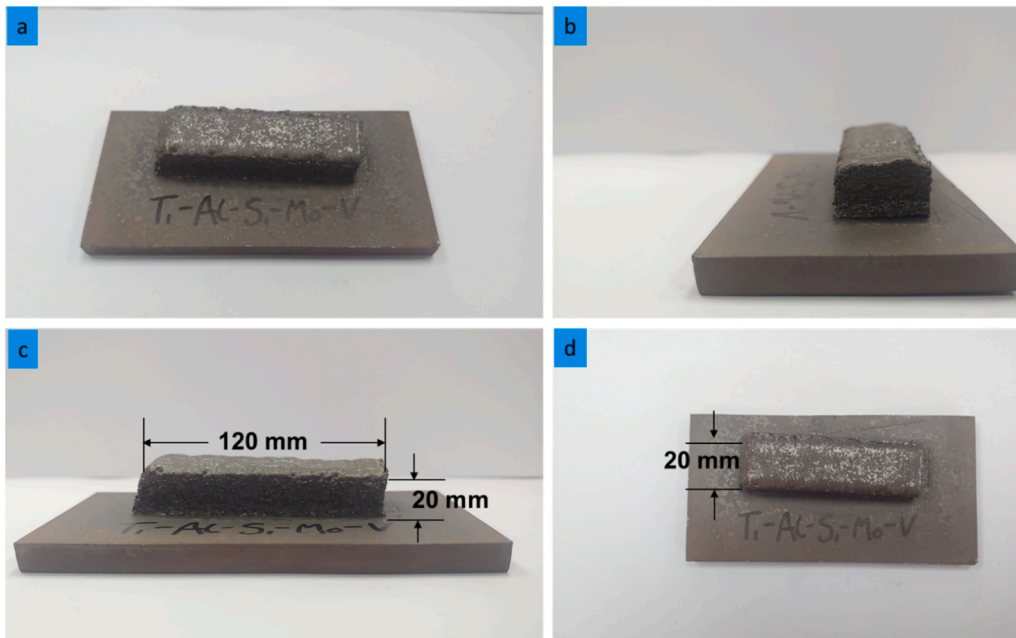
Image of a Ti-Al-Si-Mo-V Fabricated with the Modified LENS Machine.
